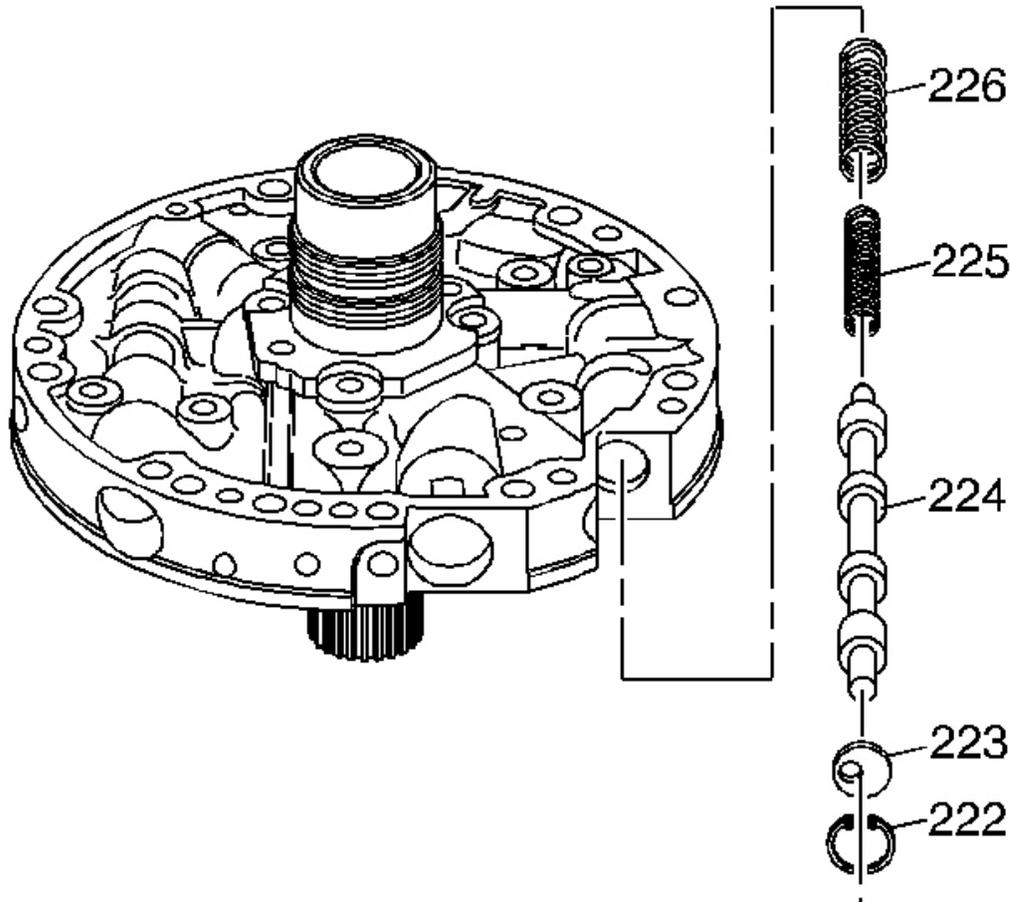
Oil Pump Converter Clutch Valve Retaining Ring, Stop Valve, Converter Clutch Valve, Converter Clutch Valve Inner & Outer Springs
